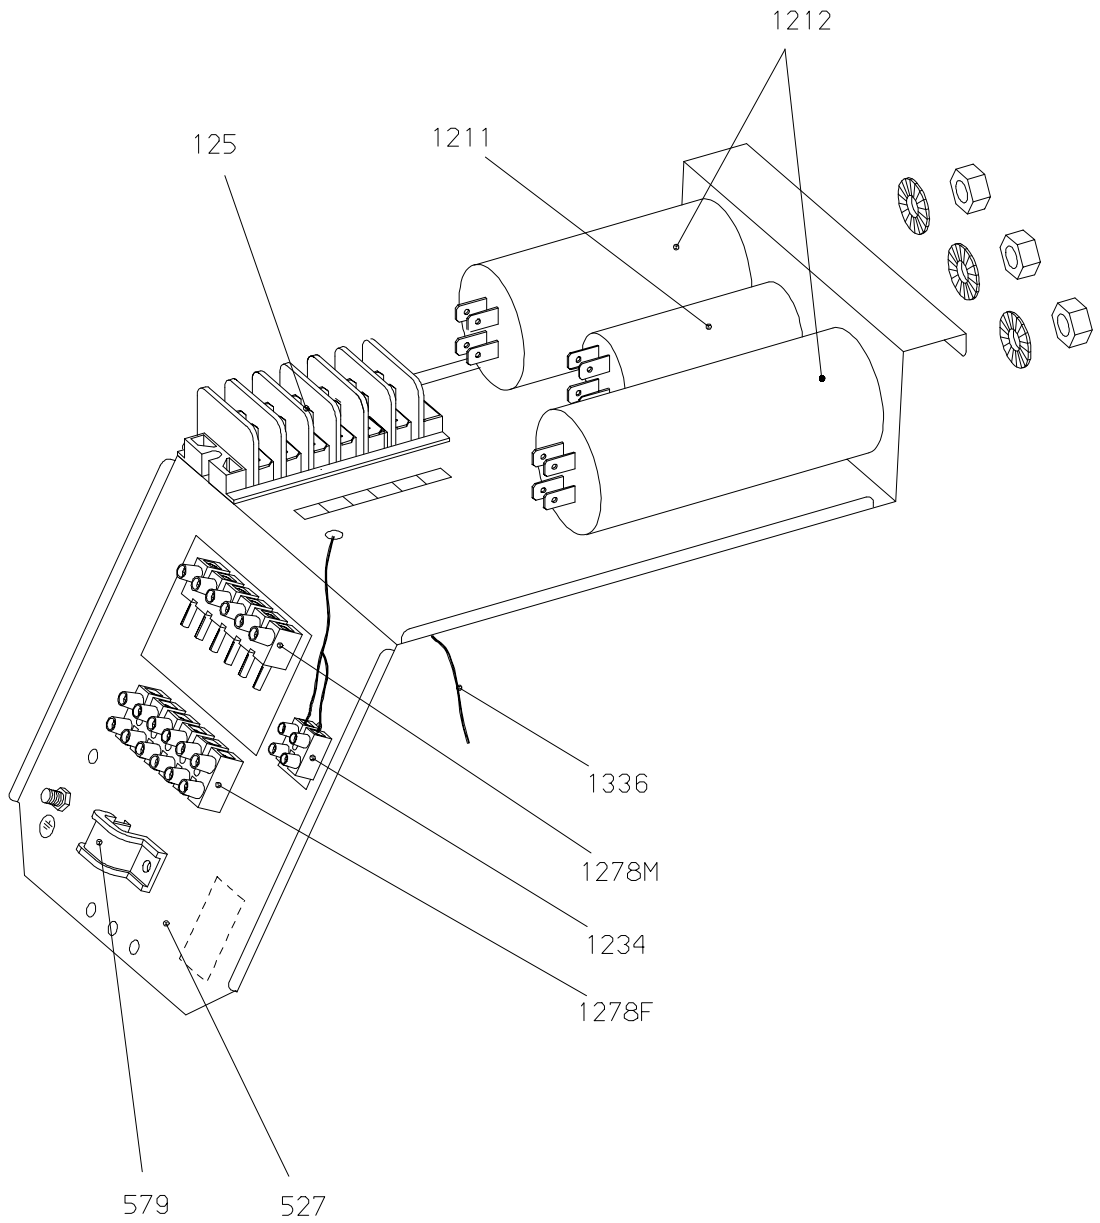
ELECTRICAL ASSEMBLY - CUE-45,50,55,60,80
